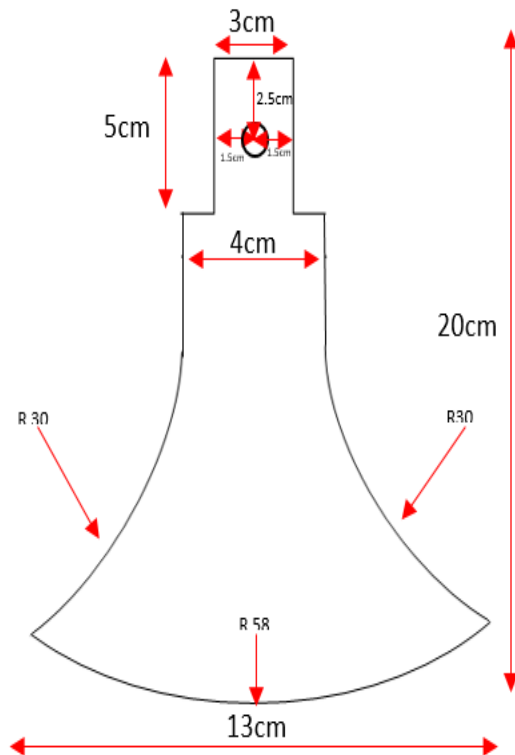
shows the frontal view of the locally manufactured axe blades (T2).
